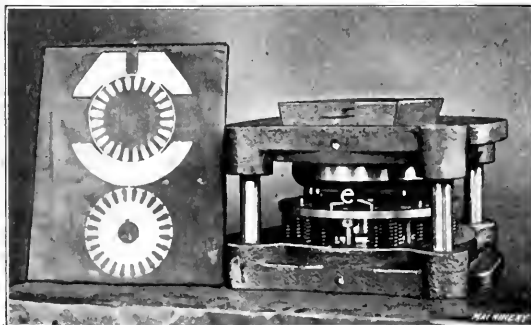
Assembled Punch and Die for blanking and notching Armature Disks
